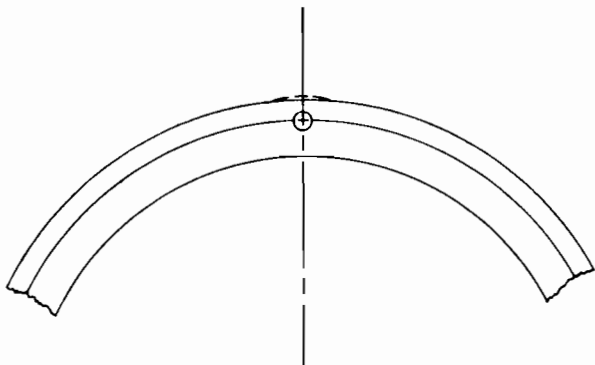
Installation of Wear Rings—Problems with Axial Pinning.
